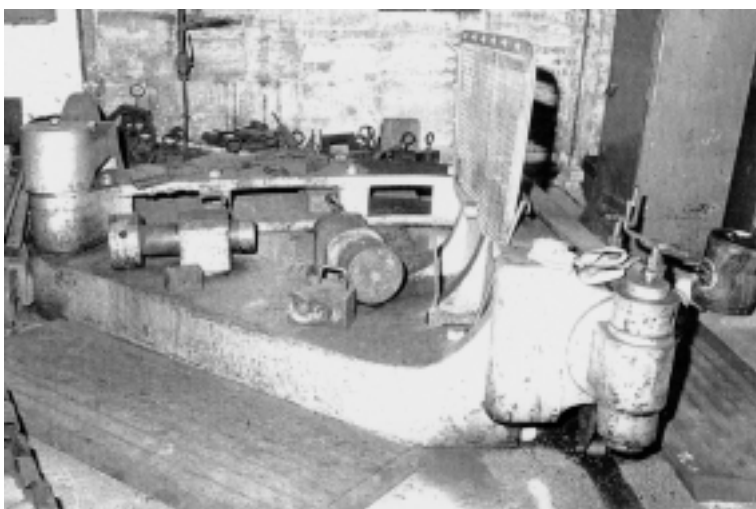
Bay 4 North. The Craven Bros hydraulic spring stripper was used to dismantle leaf spring for repair. Photo by D. Godden 1985.
